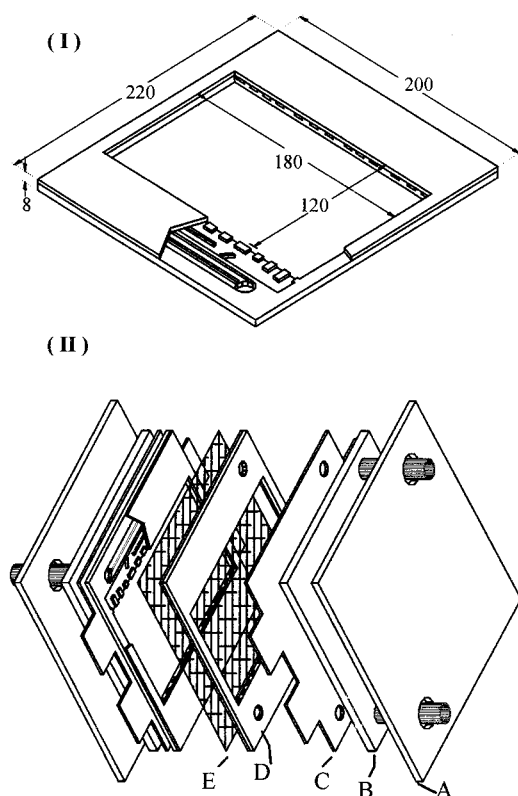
(I) View of a compartment (or chamber) showing details of flow distributors and geometric dimensions (mm). (II) Exploded view of the UA200.08 reactor in the divided mode showing the (A) backplate, (B) polypropylene block with flow channels, (C) flat plate, (D) compartment (or chamber), and (E) separator.
